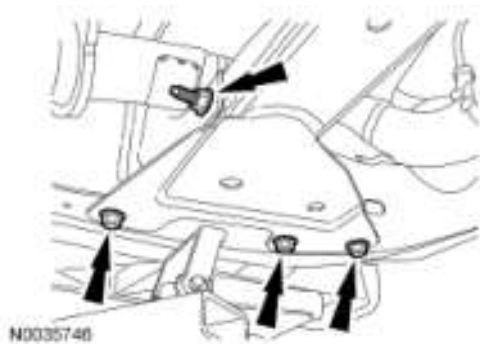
Locating LH Side Crossmember Bolts And Nut
